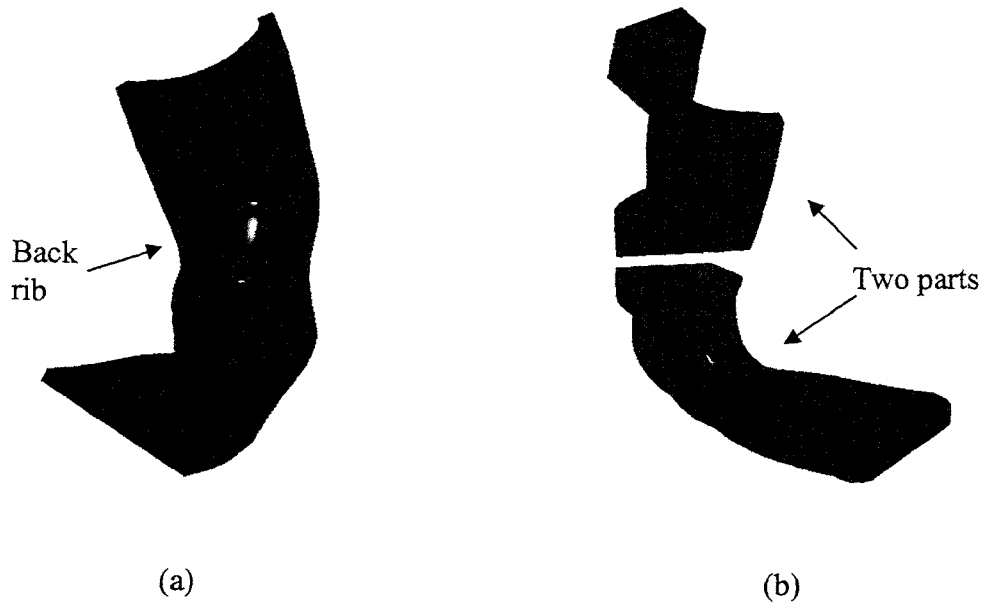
AFO with integrated arrangement for fixing double ball & socket joint (a) back view of designed rib (b) two piece front view
